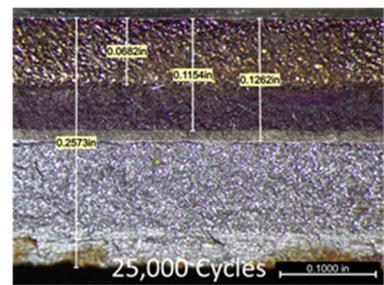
FRACTURE SURFACES OF SELECT REINFORCED PIPE SAMPLES (SAMPLES 24-26, VENDOR B)
